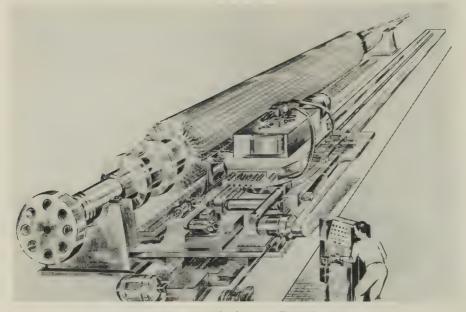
Tape controlled drill and mill—here is flexibility in a package
